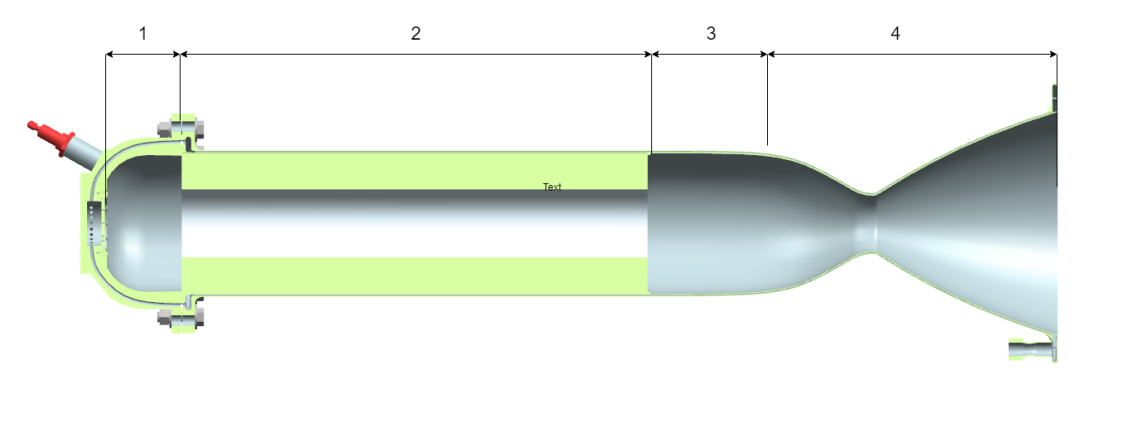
Section of the engine, with head casing attached and fuel grain loaded, 1 - Pre-combustion chamber, 2 - Combustion chamber, 3 - Post-combustion chamber, 4 - Nozzle
